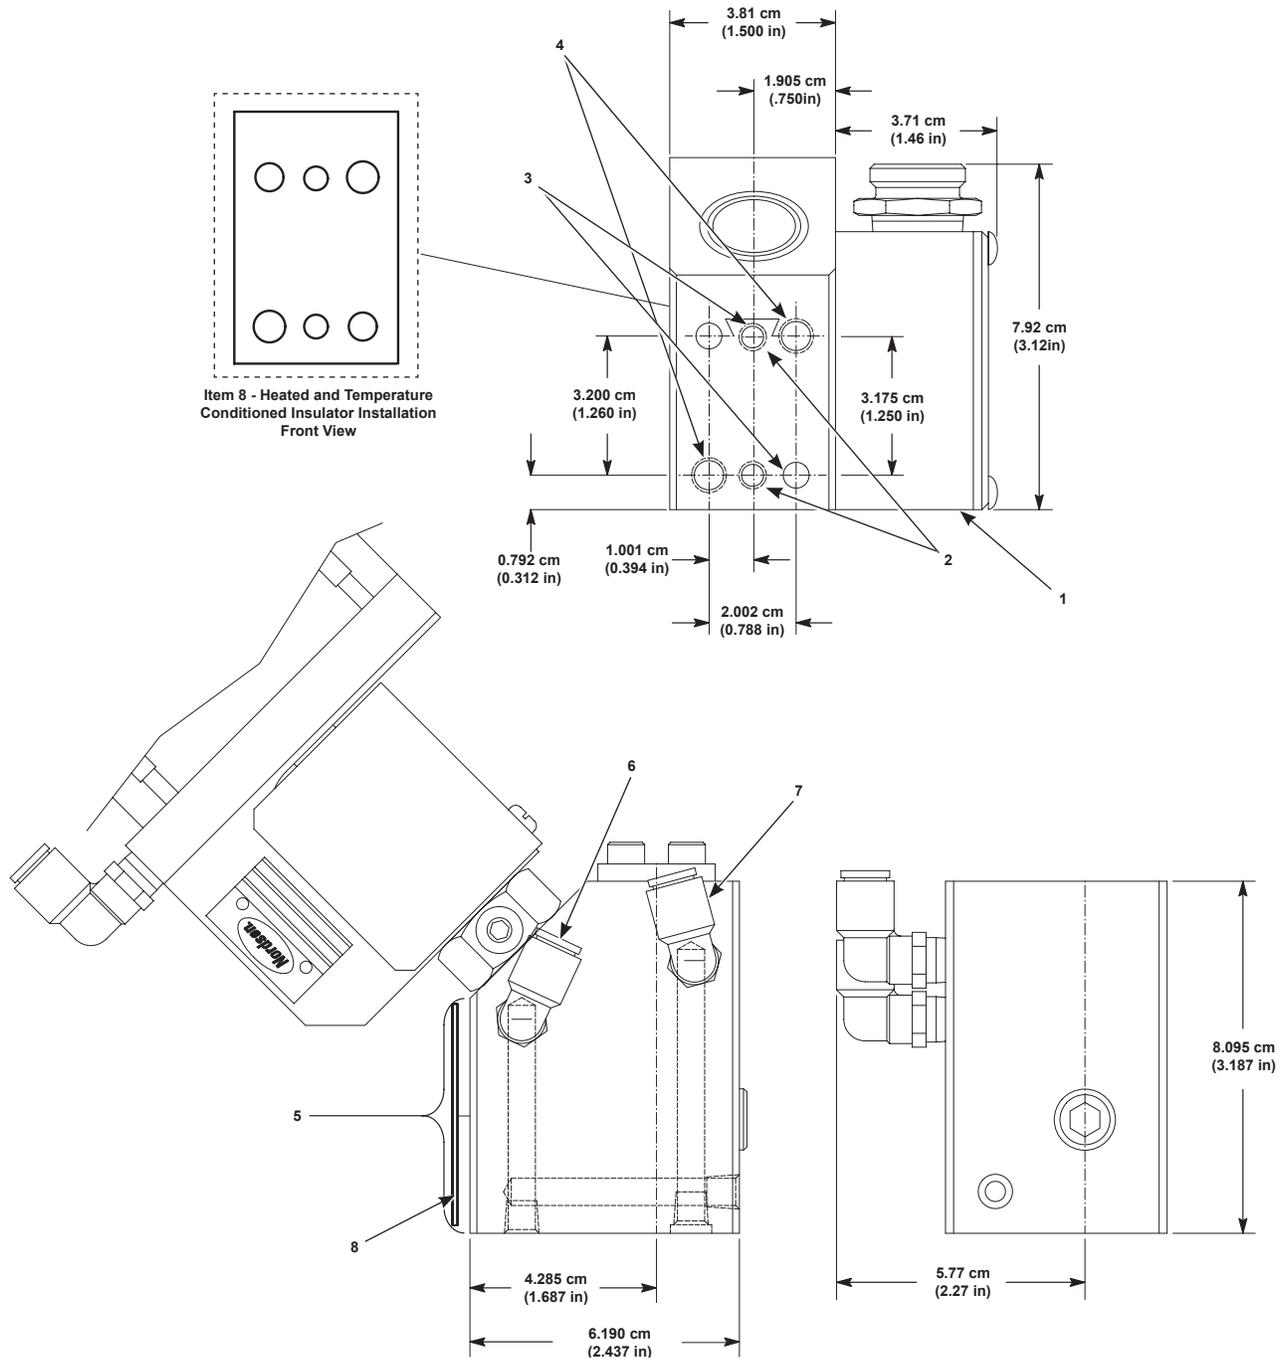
Temperature Conditioned CE20 Gun and Surface Mounting Dimensions
